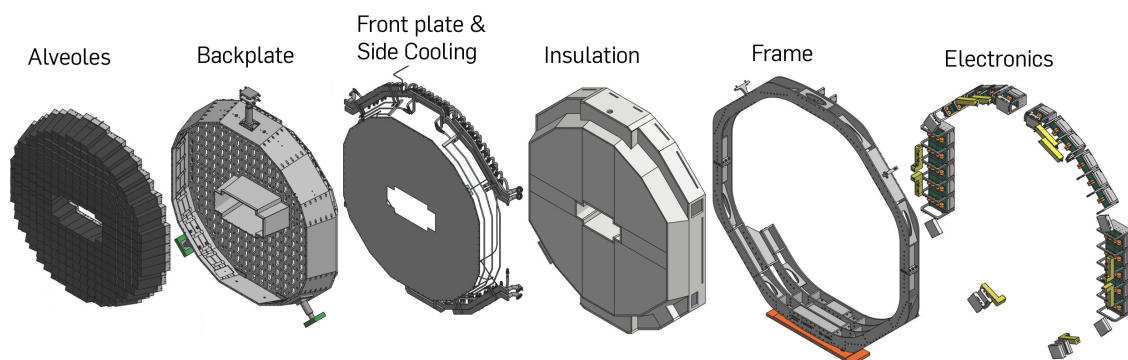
Exploded view of the components of the TS EMC forward endcap
